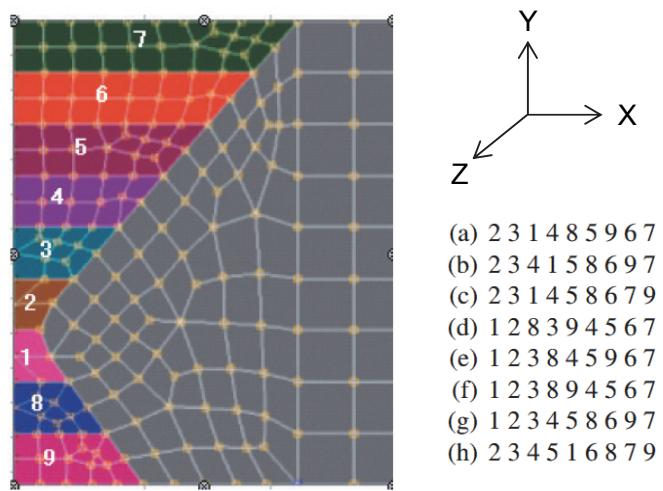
Illustration of welding bead numbers and sequences [12].
